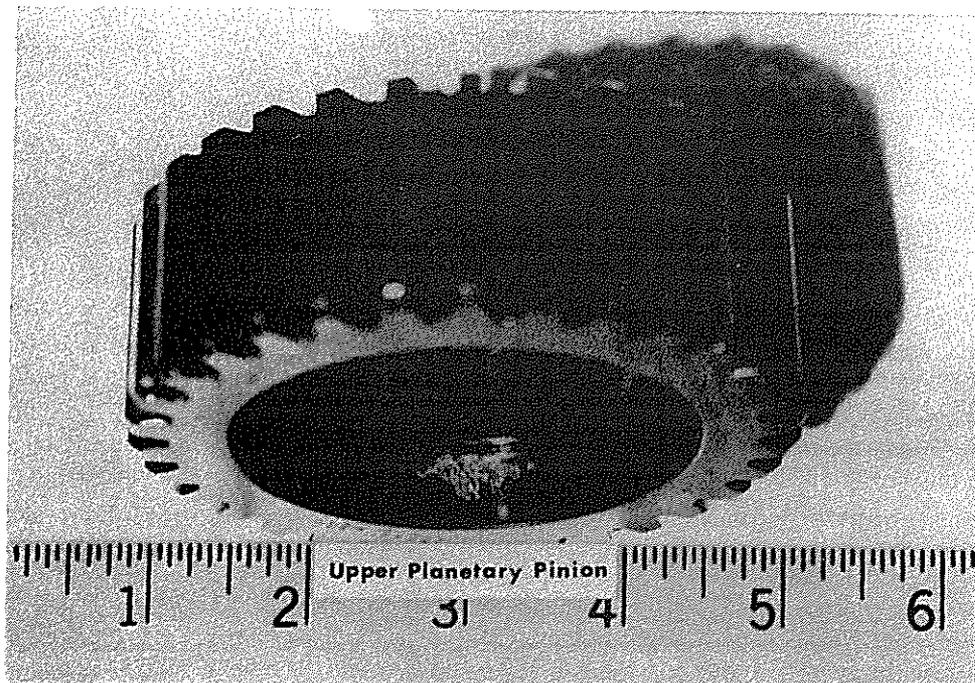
Planetary Pinion Bearing Failure
